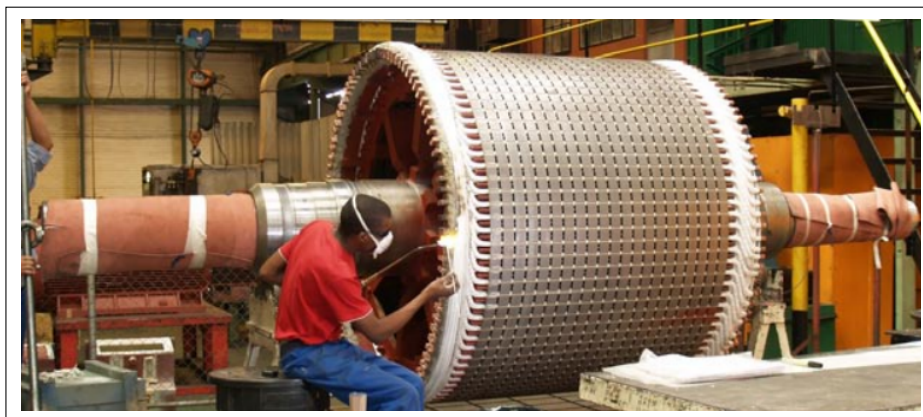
ACTOM South Africa 7 MW mill motor wound rotor core [4].
